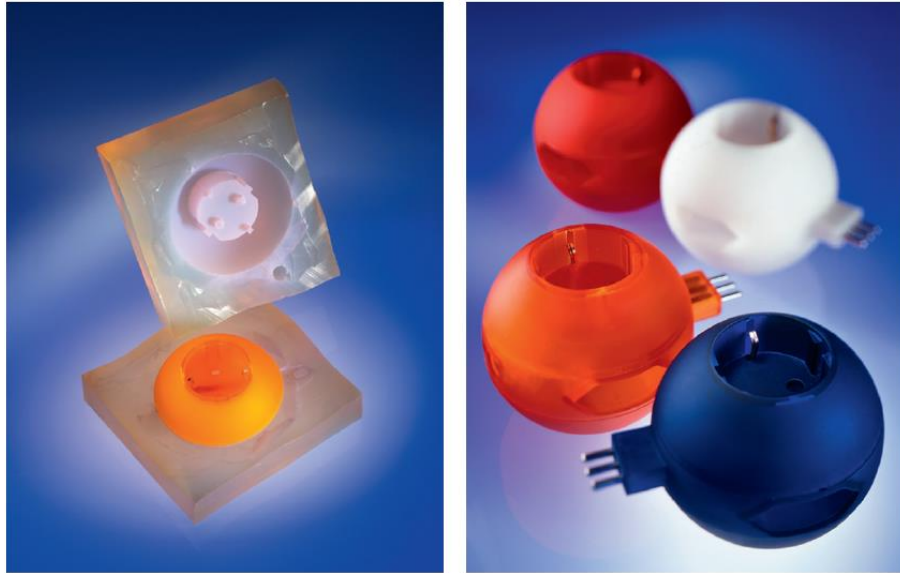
Indirect prototyping: vacuum casting; system plug, master model made by means of stereolithography; mold with upper part of the plug housing (left), assembled plugs (right).
